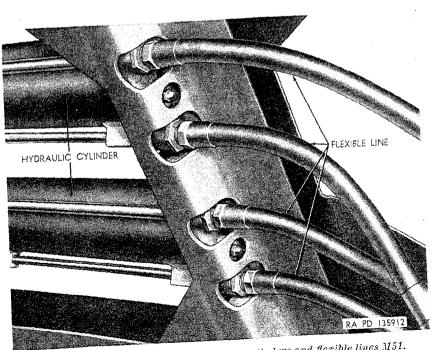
Front bottom view of hoist cylinders and flexible lines M51.
